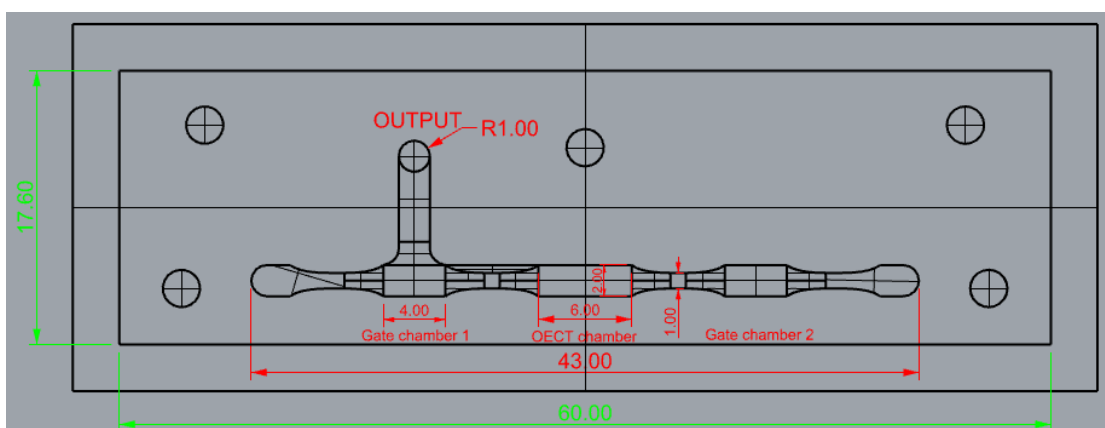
Bottom master mold for PDMS fluidic, with dimensions in mm.
